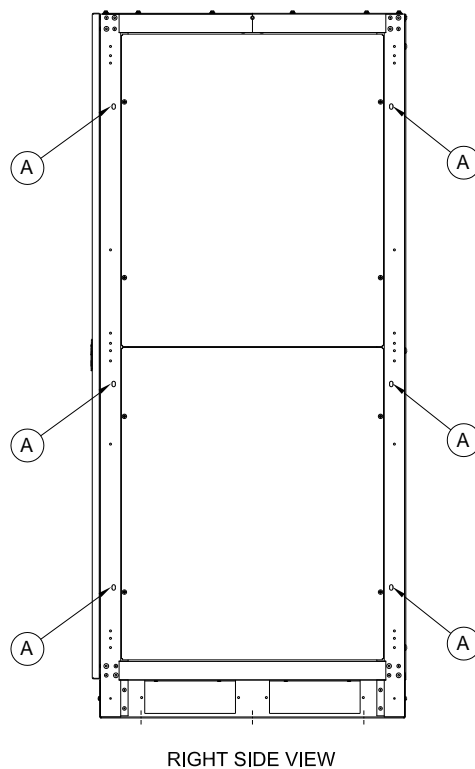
Cabinet to Cabinet Mounting Hole Locations
